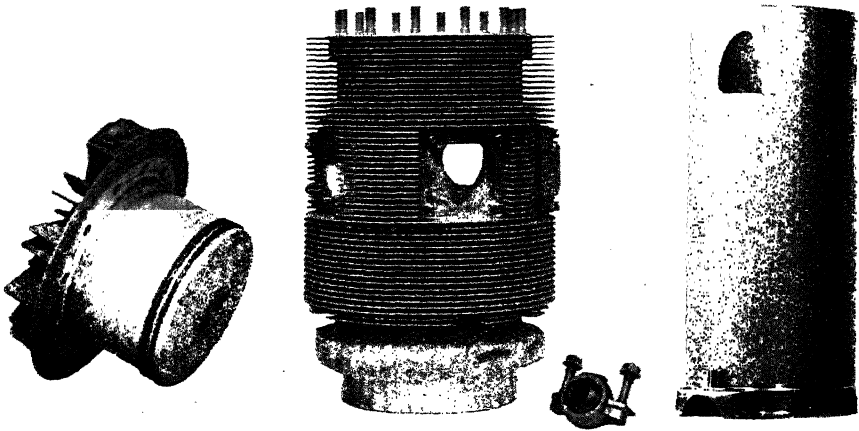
SHOWING SLEEVE, BARREL, AND JUNKHEAD
